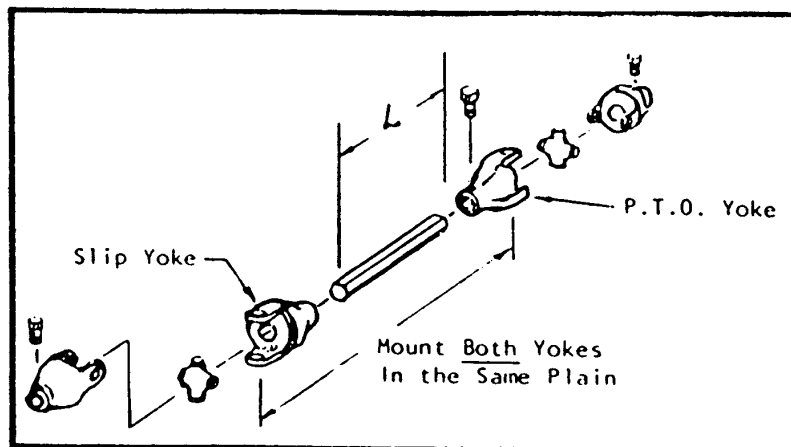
DRIVE SHAFT ASSEMBLY
